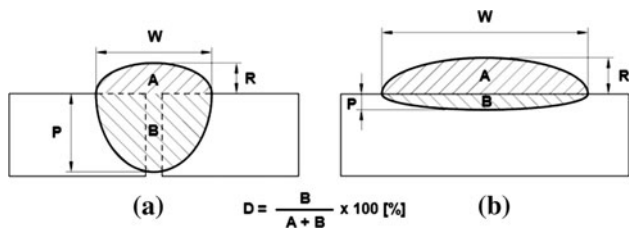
Desired weld bead geometry: (a) union joint (typical applications) and (b) cladding
